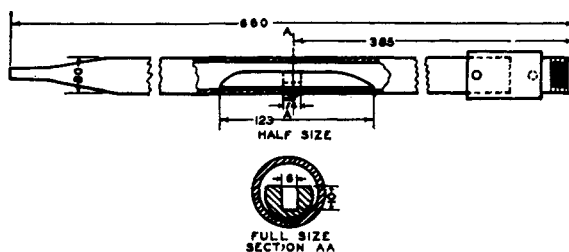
Reaction tube and sample boat. All dimensions in millimeters.
